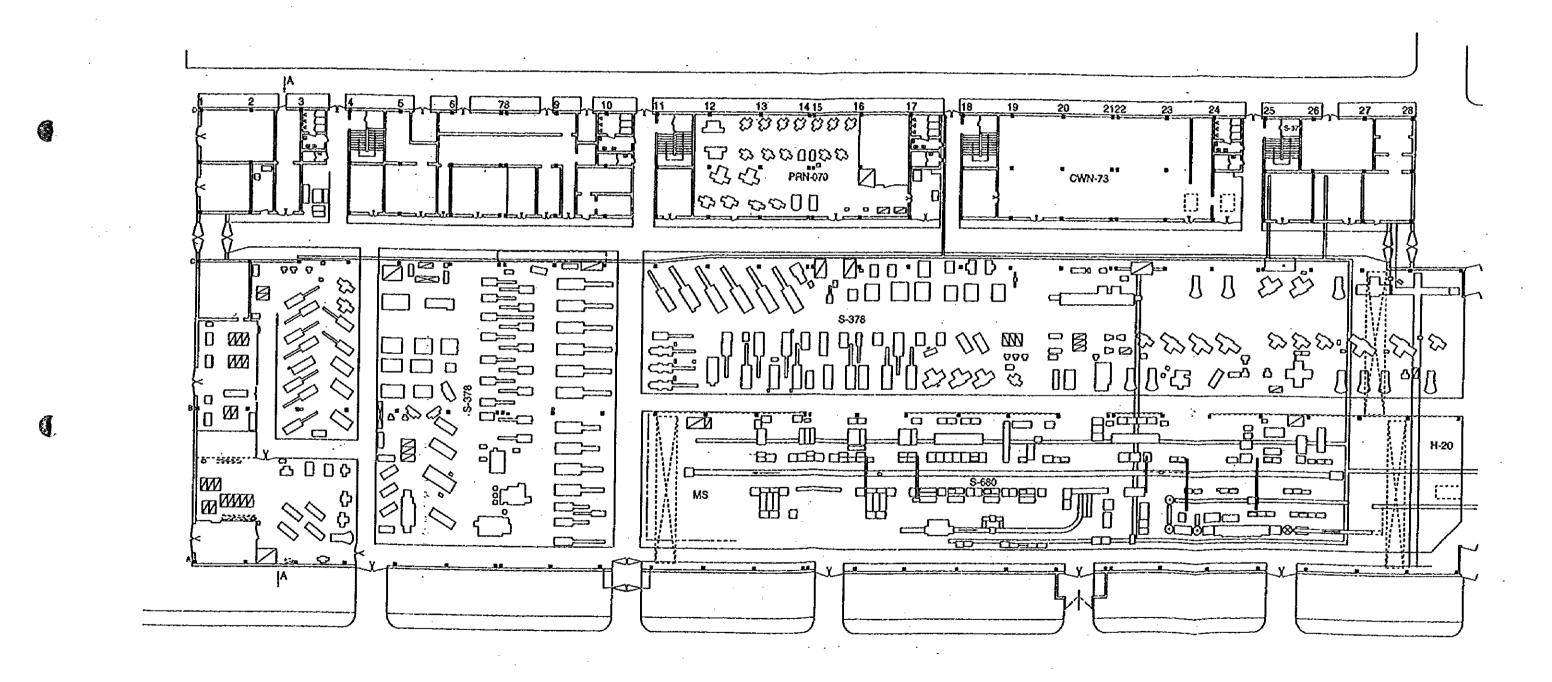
Engine main parts machining Lay-out (S378)
